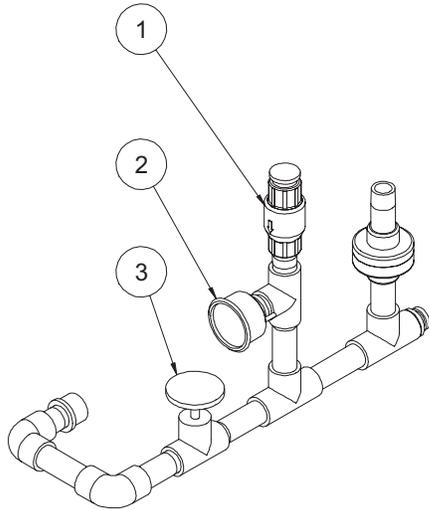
G2-2-G2-6 pressurized feed piping subassembly.
